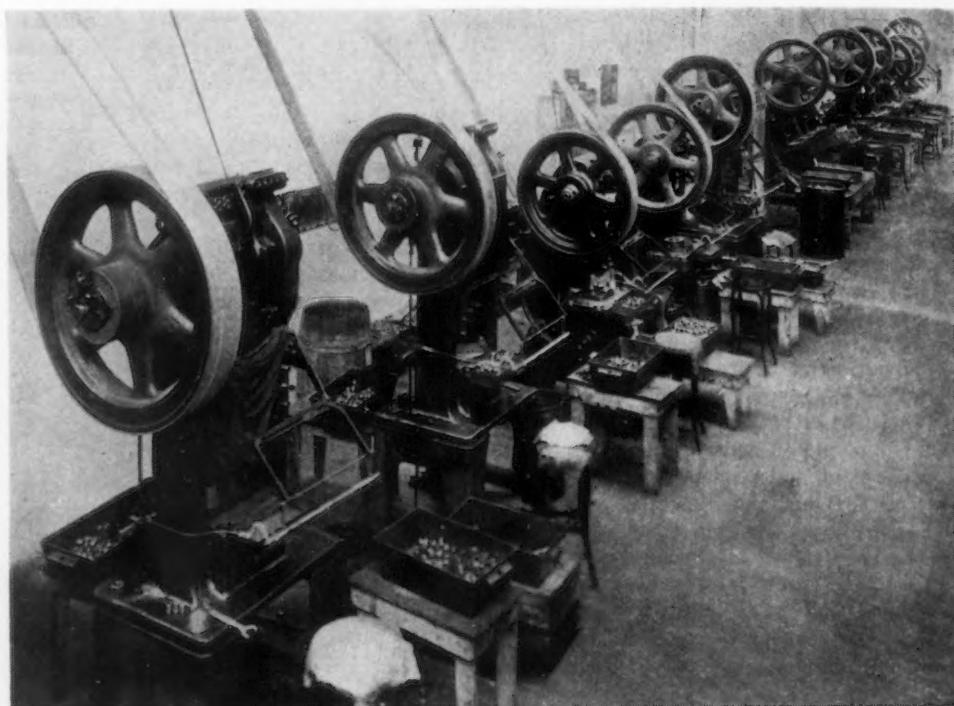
A line of punch presses arranged in two groups, stamping out parts for electric light fixtures. An ideal set-up for modern group drive methods.
